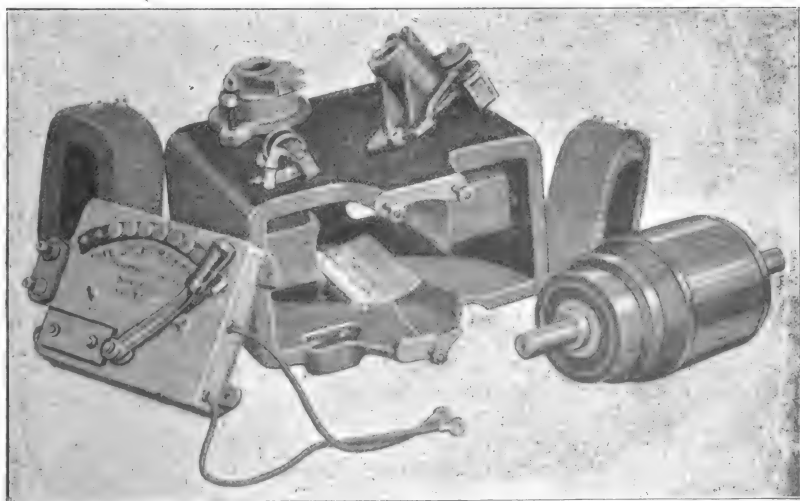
Parts of Jeffrey Coal-cutter Motor.
